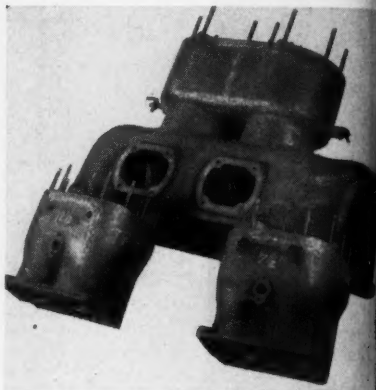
This compressor cylinder casting was cracked in several places. Repaired by welding, it is now tight and strong.
